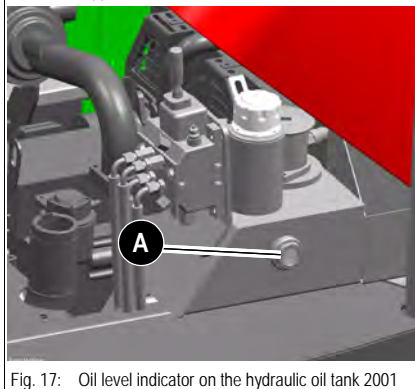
Oil level indicator on the hydraulic oil tank 2001
